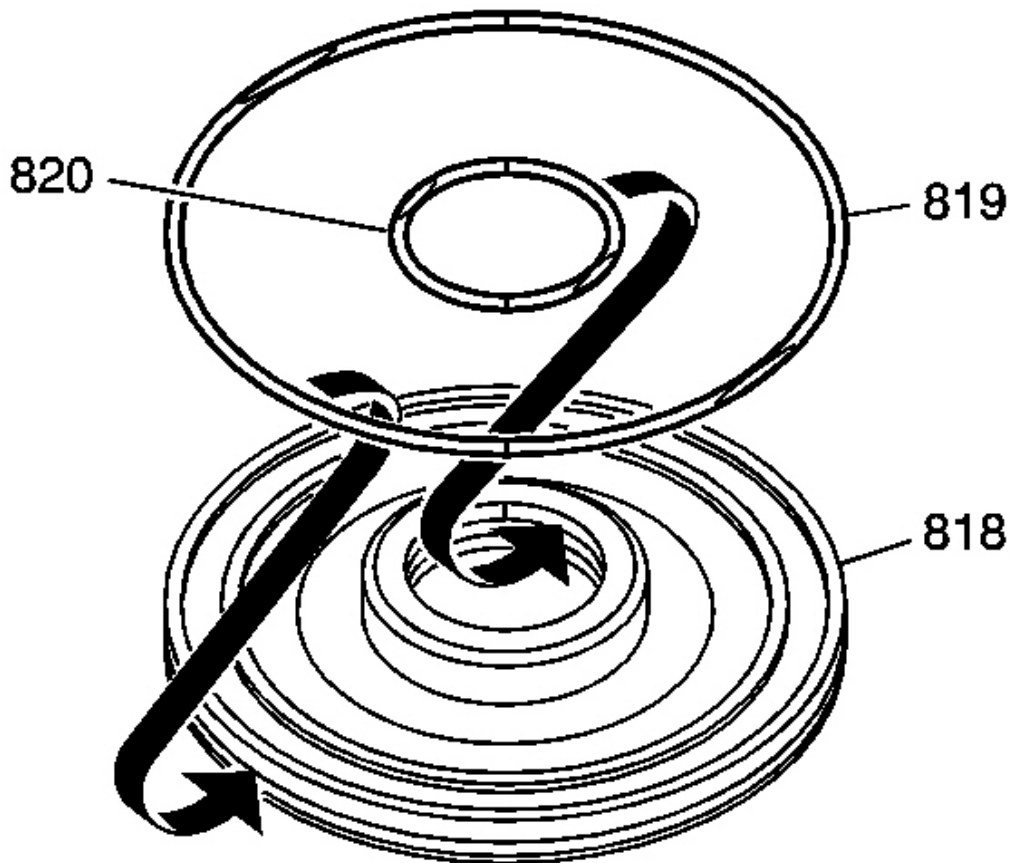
3rd Clutch Piston & Outer/Inner O-Ring Seal Removed
